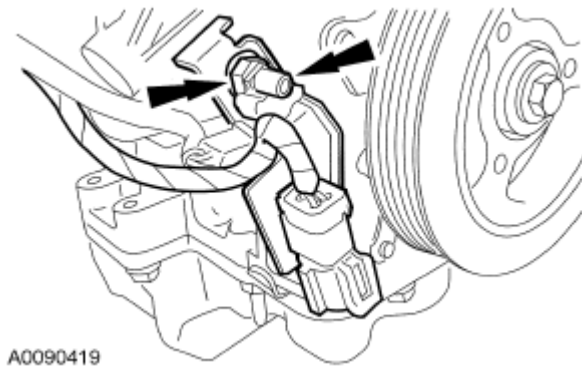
Locating Heated Oxygen Sensor (HO2S) Electrical Connector Bracket
